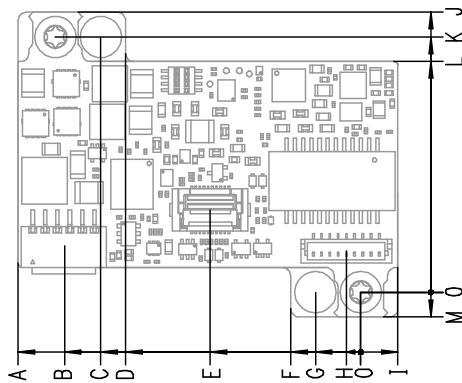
FETK-S1.1 Dimensions - Top View
